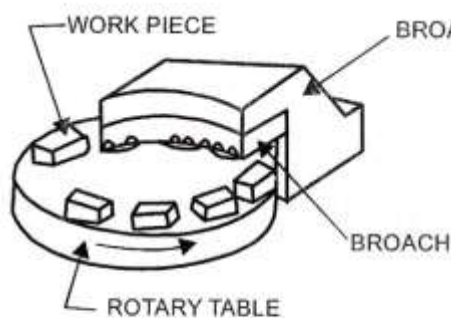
ROTARY-TABLE CONTINUOUS BROACHING MACHINE
